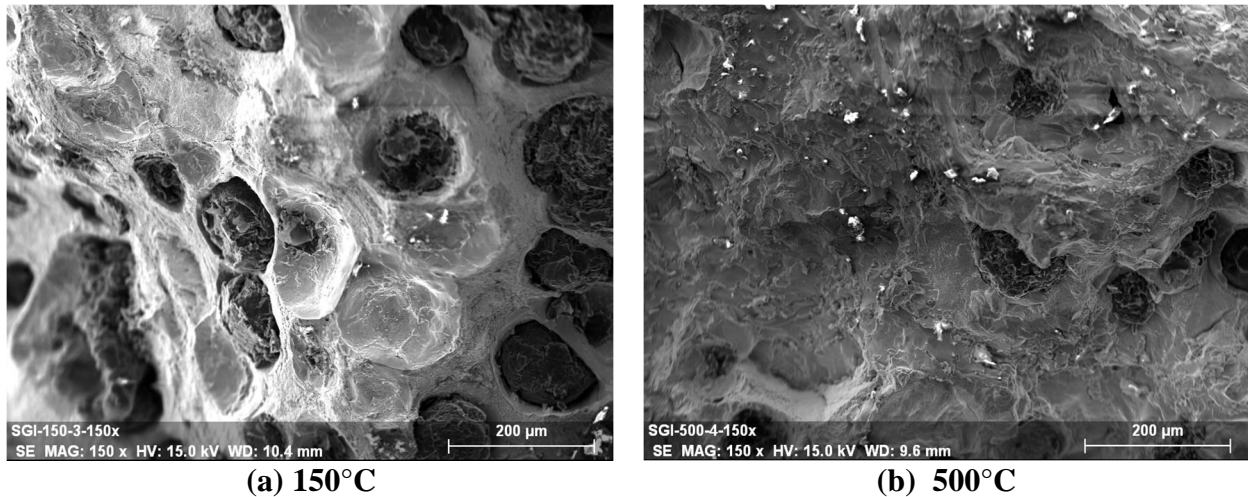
Fracture surface corresponding to tensile test of SGI samples
